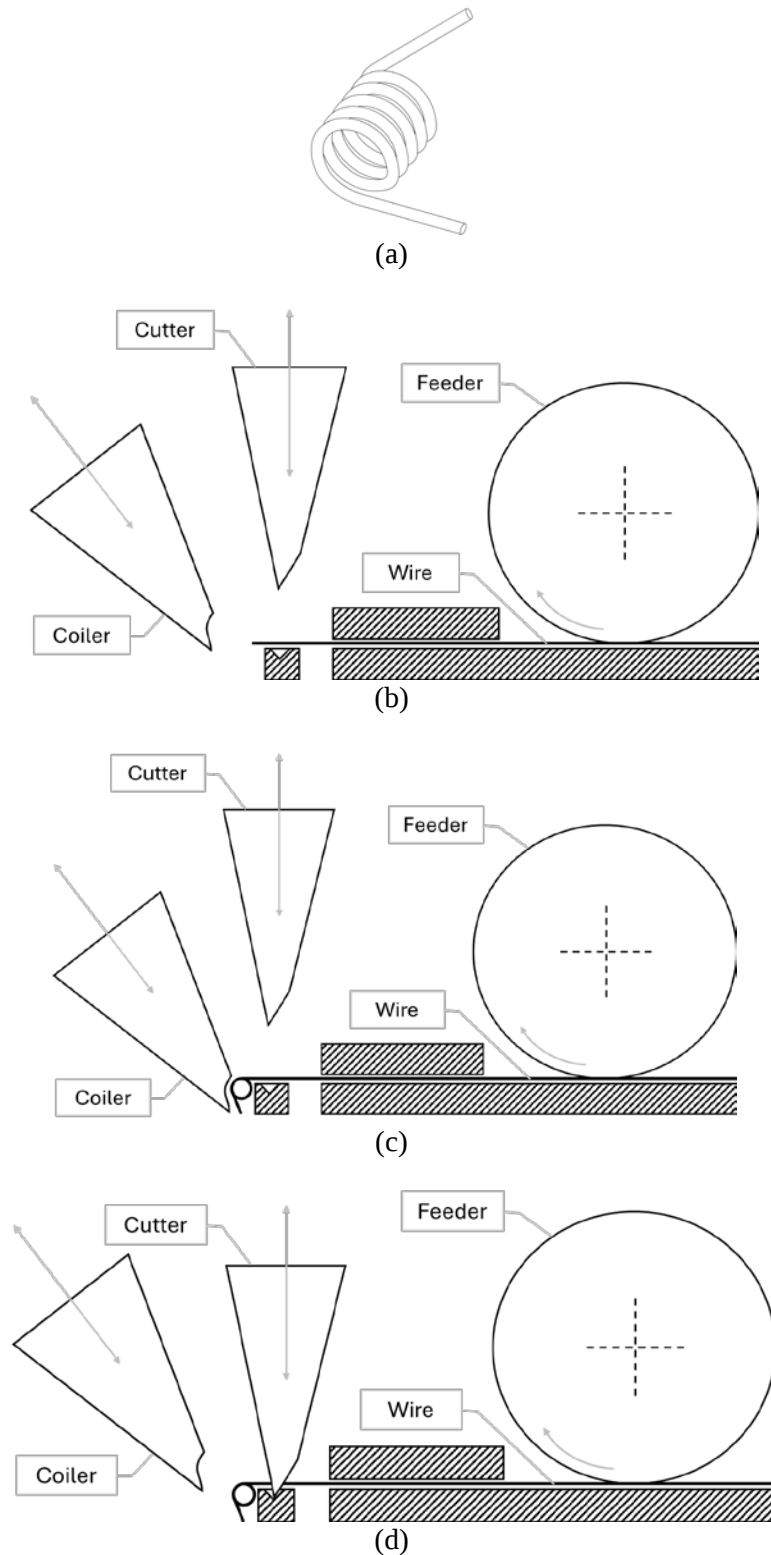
(a) A torsion spring; (b) A schematic, side-on view of a torsion spring forming machine with both the Coiler and Cutter mechanisms in the retracted position; (c) A schematic view the machine with the Coiler mechanism in the extended position and Cutter mechanism in the retracted position; (d) A schematic view of the machine with the Coiler mechanism in the retracted position and Cutter mechanism in the extended position.
